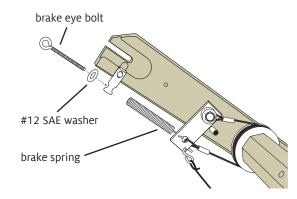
INSTALL BRAKE EYE BOLT AND BRAKE SPRING
